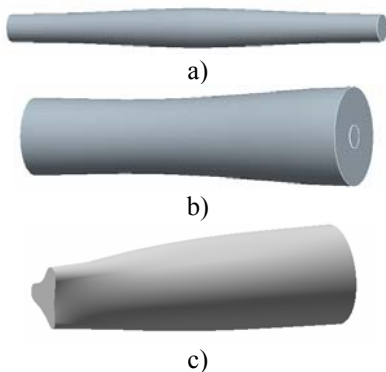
Final surface shape: rigid (a) and elastic clamping (b) rigidchuck with elastic three-jaw (c)
